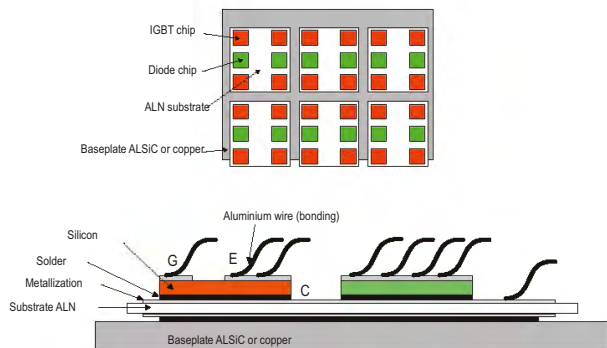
IGBT structure, a stack of layers of different materials and many welds and solders.
